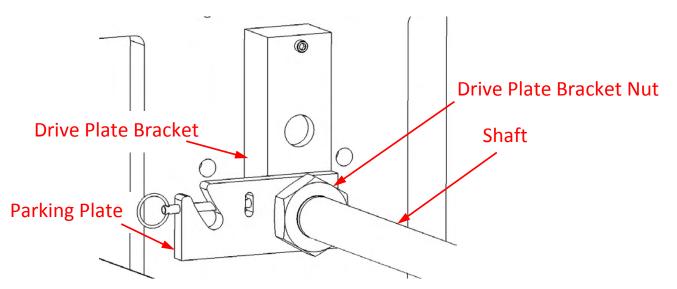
Drive Plate Mount for C01-000336-000 and C01-000263-000
